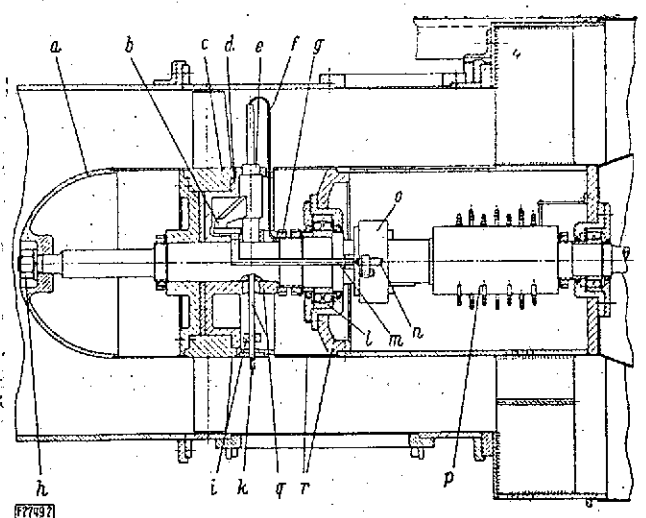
Details of the Experimental Device. a rotating hub, b probe rotation device, c rotor, d probe holder, e clamp arrangement for radial probe adjustment, f pressure measuring leads, g and h female screws to adjust the probe relative to the rotor in the peripheral direction, i counterweight, k co-rotating probe, l main bearing, m lever, n spindle, o axially displaceable hub, p pressure converting device, q rotating part, r fixed part.
